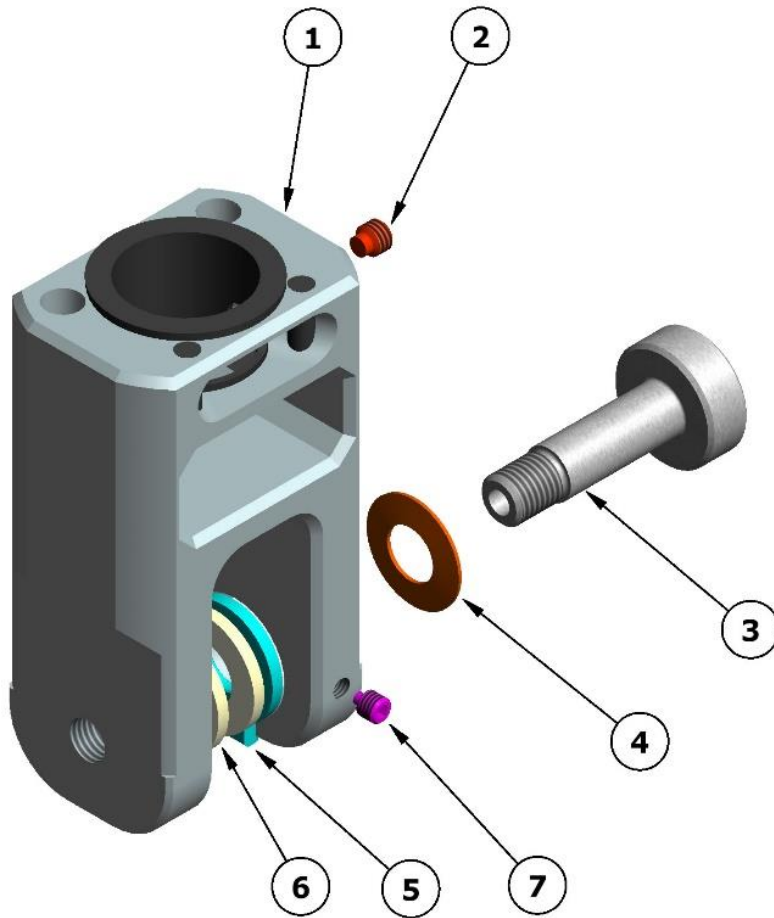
Y-Version Assembly Harmonized, W50-57003.
